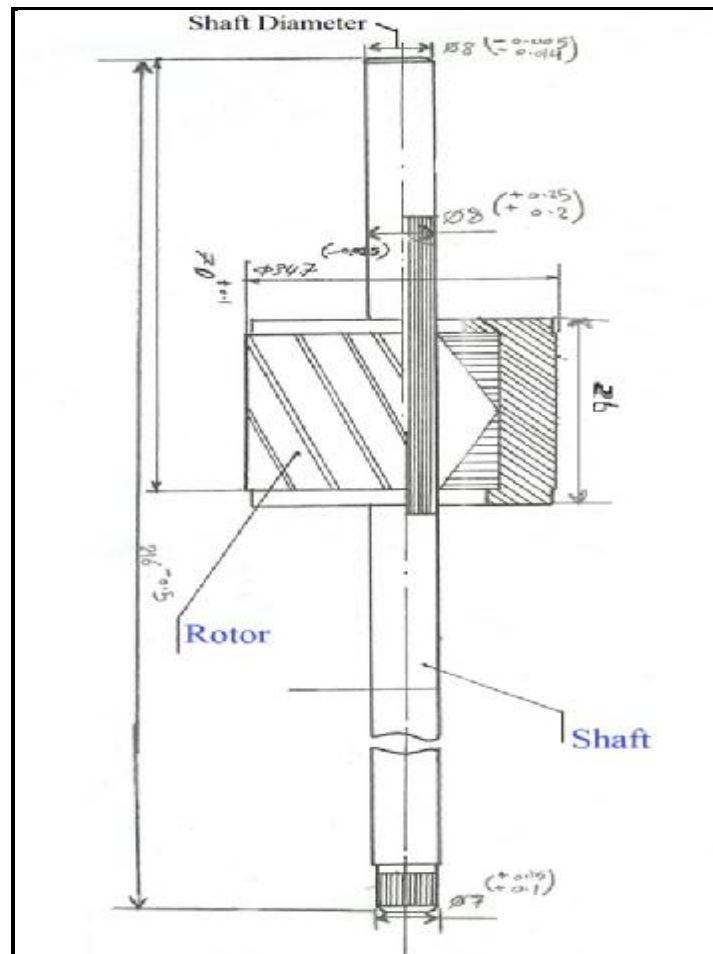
Tolerances of Rotor Assembly [16].
